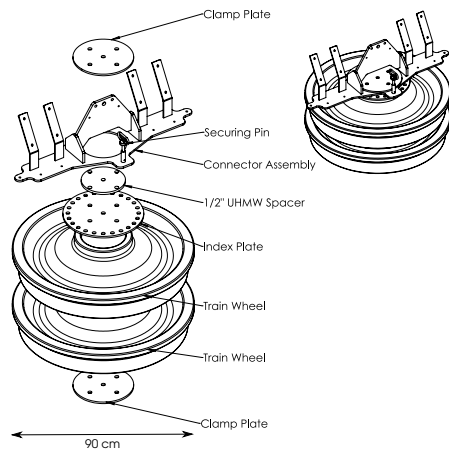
Anchor design by Dirk Brussow from ONC team. The rotating structure is held together by threaded bars connecting the clamp plates. The two steel lines of a string are connected to the connector assembly. The connector assembly part also provides two mounting points for two ODI connector plates [48].
